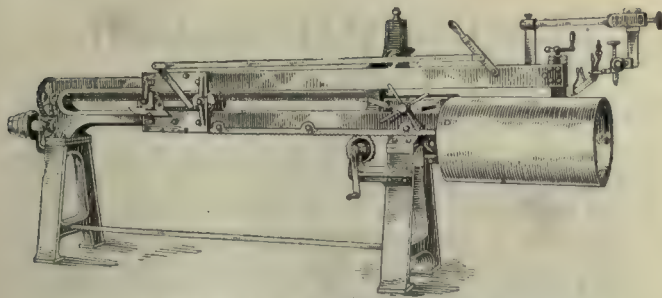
HEAVY DRUM WELDING MACHINE
